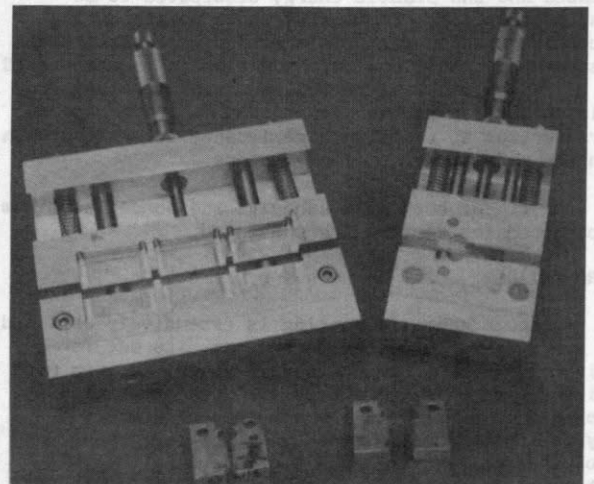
Alignment jig used to bond aluminum compact tension specimens.
